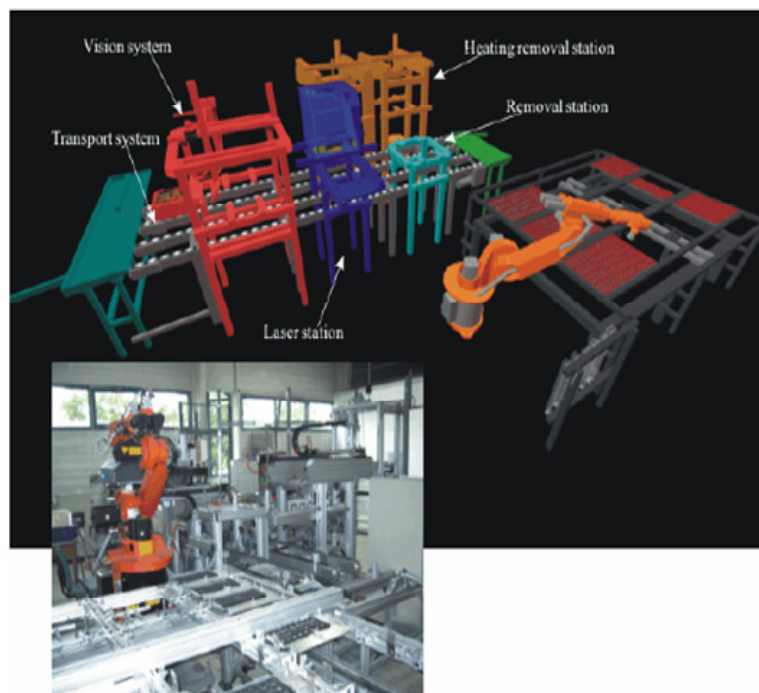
Disassembly cell for PCB (Kopacek and Kopacek, 2005)
